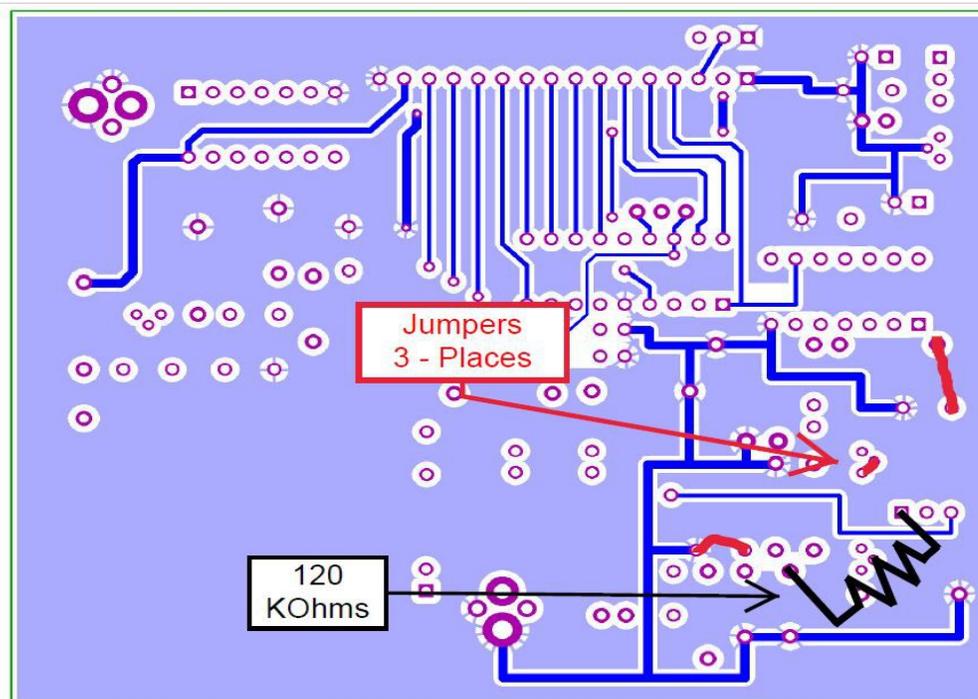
X-Checker PCB Solder Side (Bottom) View.
